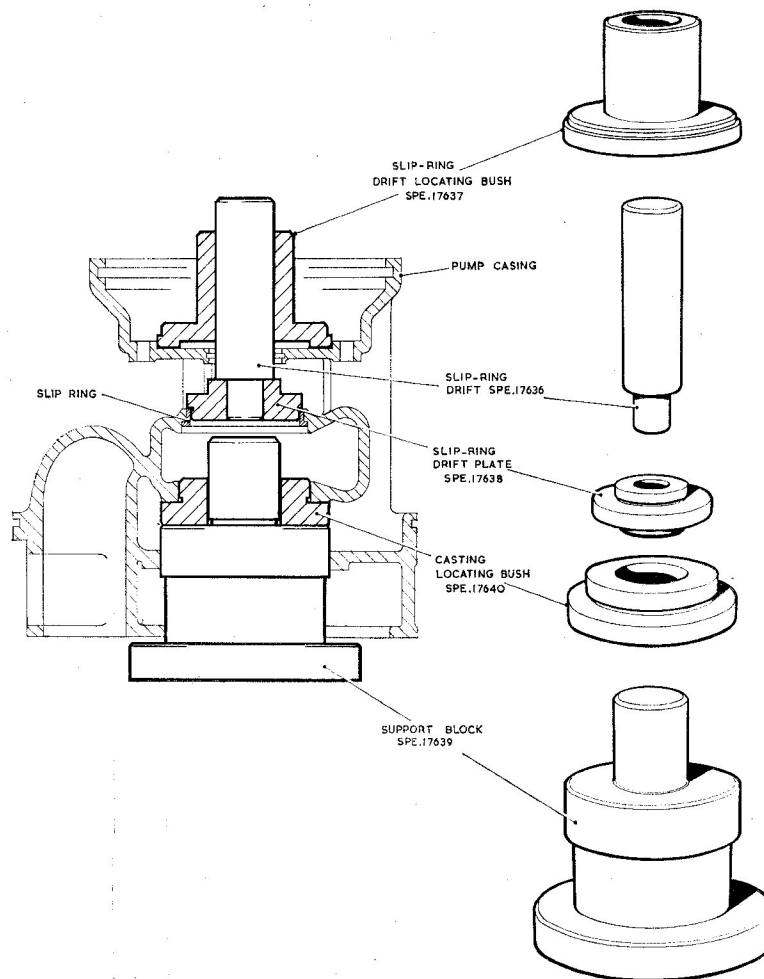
Tools for removing the upper impeller slip-ring from the pump casting
